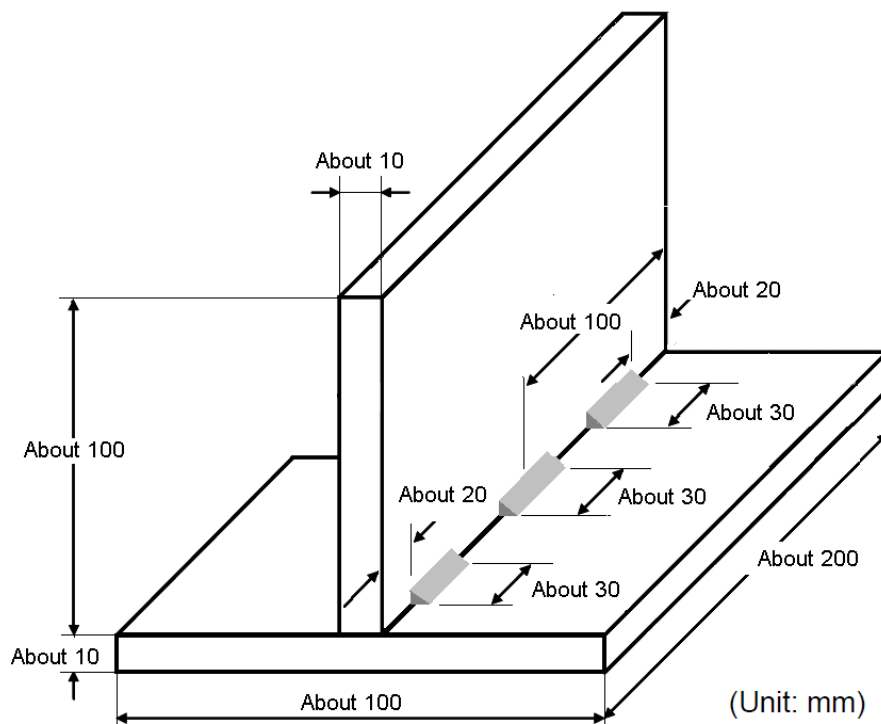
Dimensions and types of test assembly for tack fillet welds
